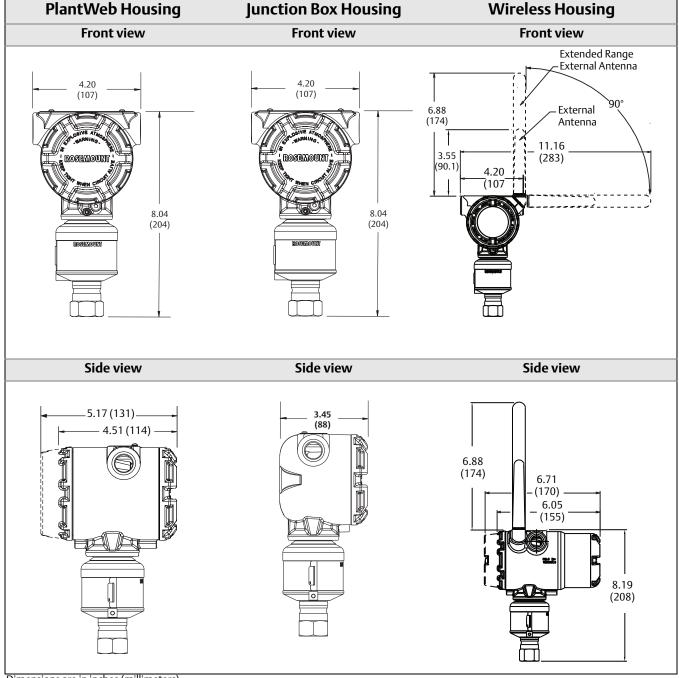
Transmitter with In-Line Sensor Module (for ranges 1A-4A, ¹/₂" NPT 316L SST process wetted connection). For detailed dimensions on other configurations, see Type I drawings at rosemount.com.
